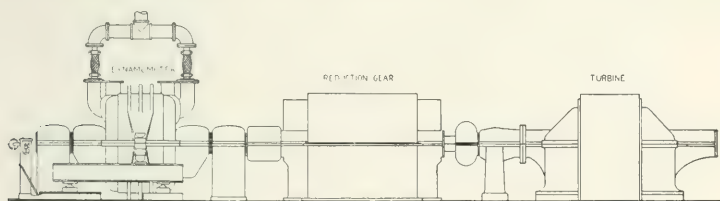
ARRANGEMENT OF TURBINE, REDUCTION GEAR AND DYNAMOMETER
